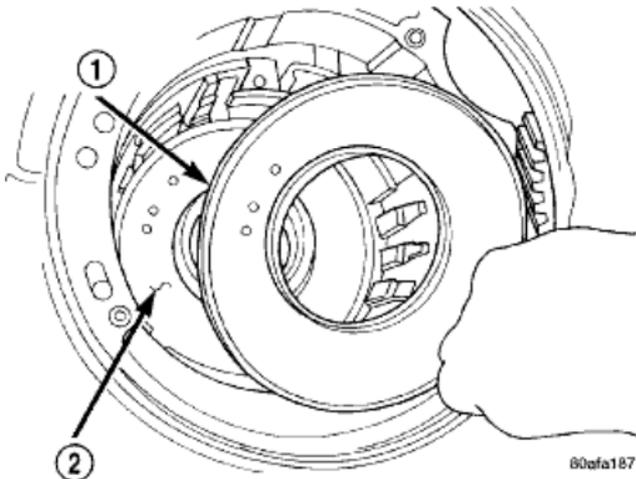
Removing/Installing Low/Reverse Piston Retainer
